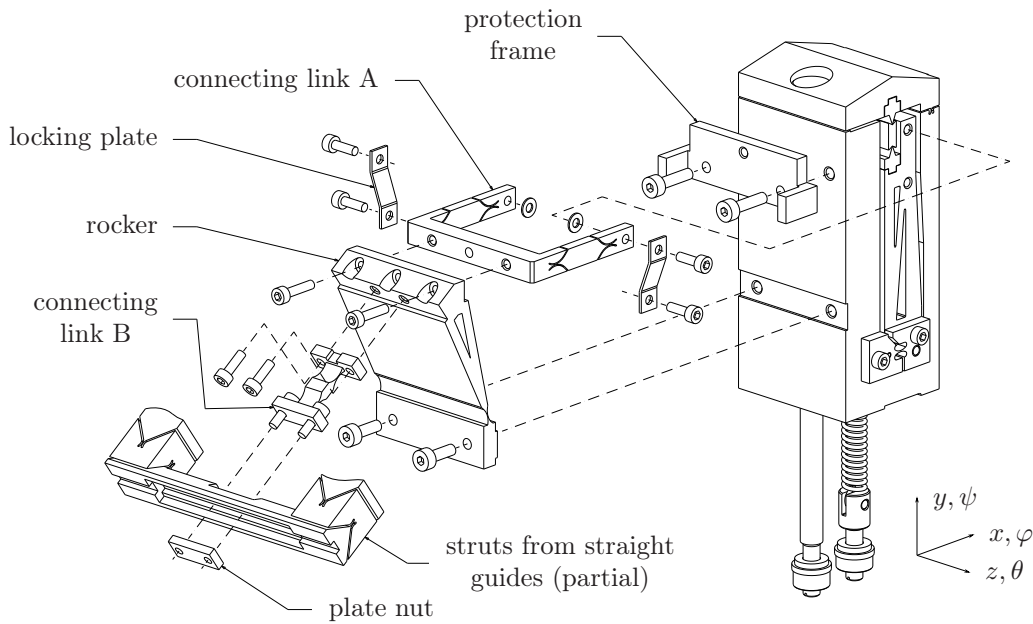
/ Exploded view showing the compensation mechanism, the rocker and the connecting links.
